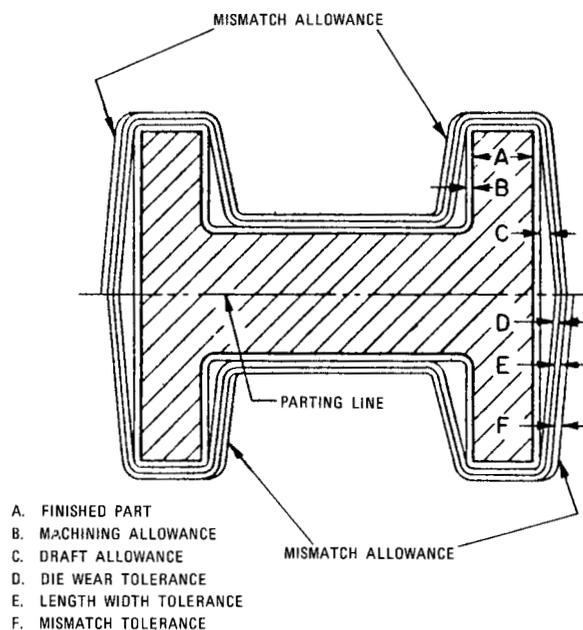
Relative Location of Forging Tolerances (from Ref. 22).
